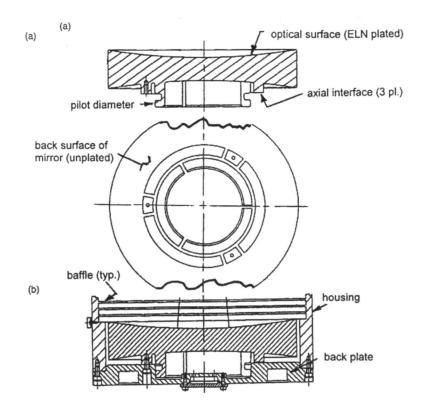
Optomechanical configuration of a SPDT mirror mounted in a SPDT machined housing. (Adapted from Vukobratovich, et al.²⁰)
